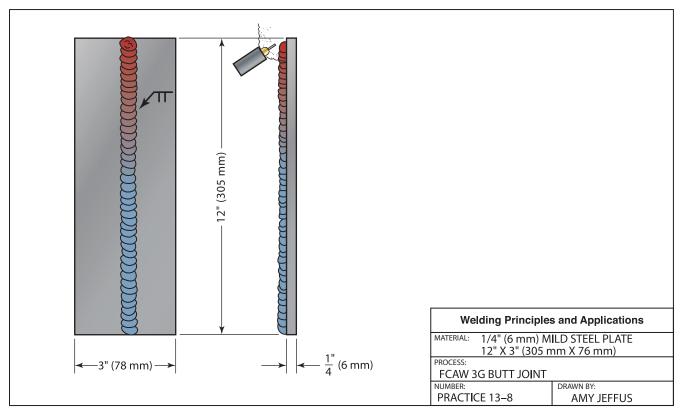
FCAW 3G butt joint, 1/4-in. (6-mm) mild steel.
